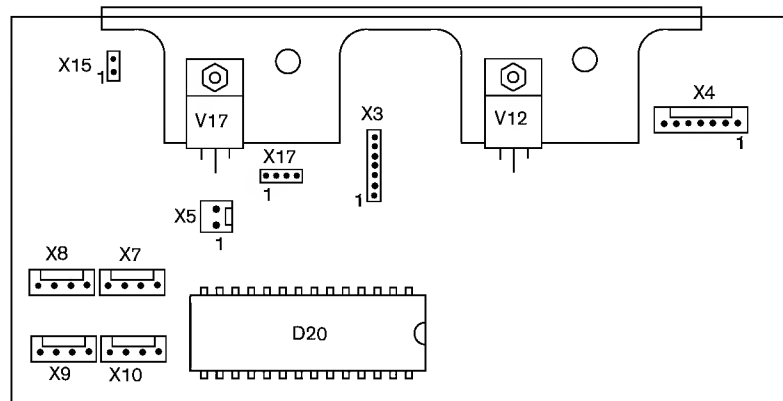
Component mounting diagram of the Pneumatics Controller PCB
